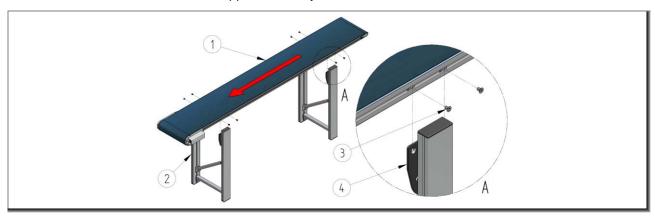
Assembly, conveyor with support AM 1030 (typical)
